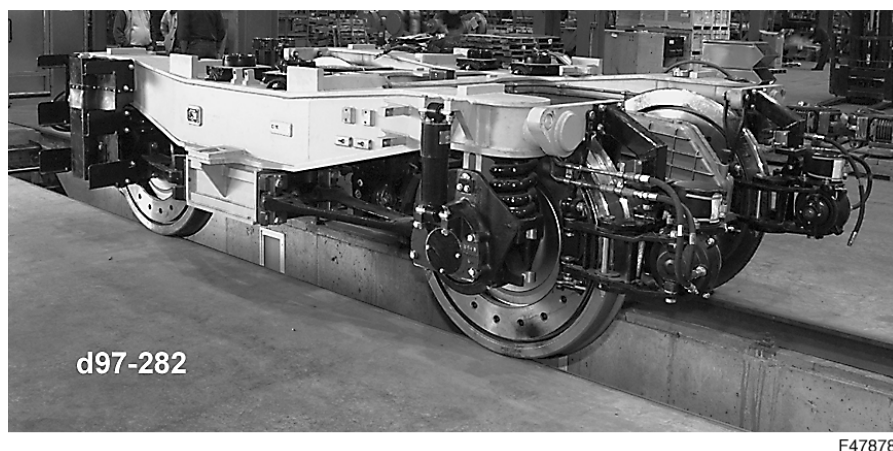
Siemens Fabricated Truck Applied to a DE30AC Locomotive – Three Quarter View
